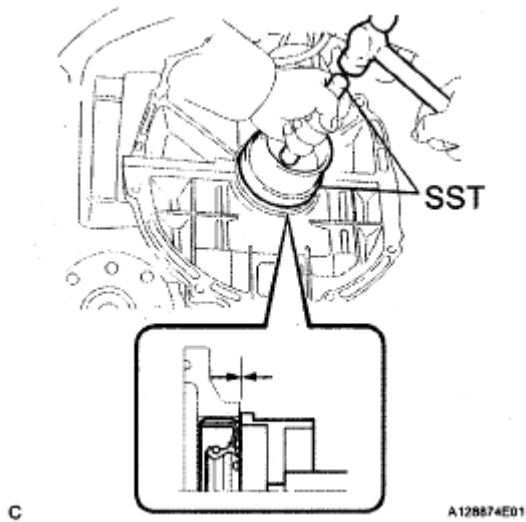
Tapping In Oil Seal Until Its Surface Is Flush With Rear Oil Seal Retainer Edge
